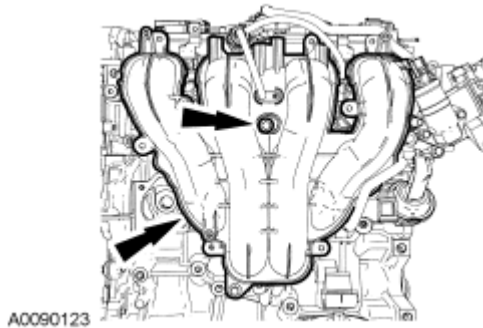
Locating Intake Manifold Gaskets & Intake Manifold
